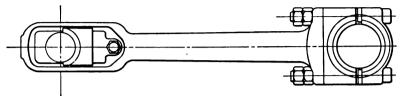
Connecting-rod for Single-acting Diesel Engine.
